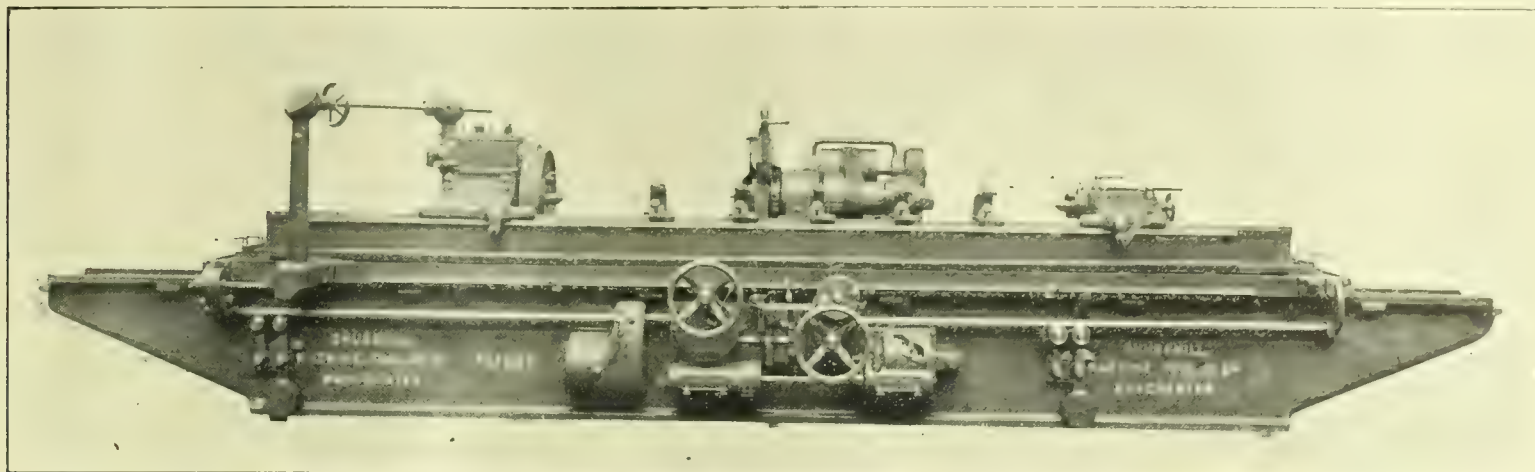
HEAVY CYLINDRICAL GRINDING MACHINE, CONSTRUCTED BY THE CHURCHILL MACHINE TOOL CO., LTD., PENDLETON, MANCHESTER.
